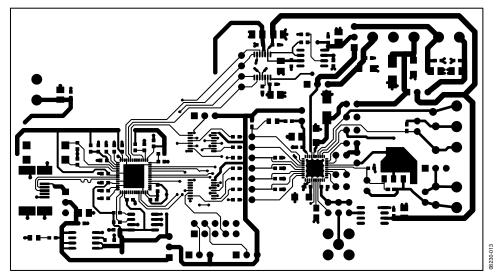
AD5422 LFCSP Evaluation Board Component Side PCB
